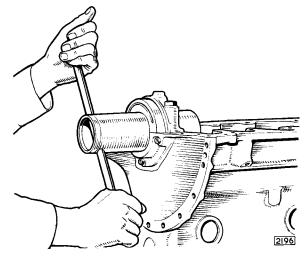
Sizing the rear oil seal using Churchill Tool No. J.17
